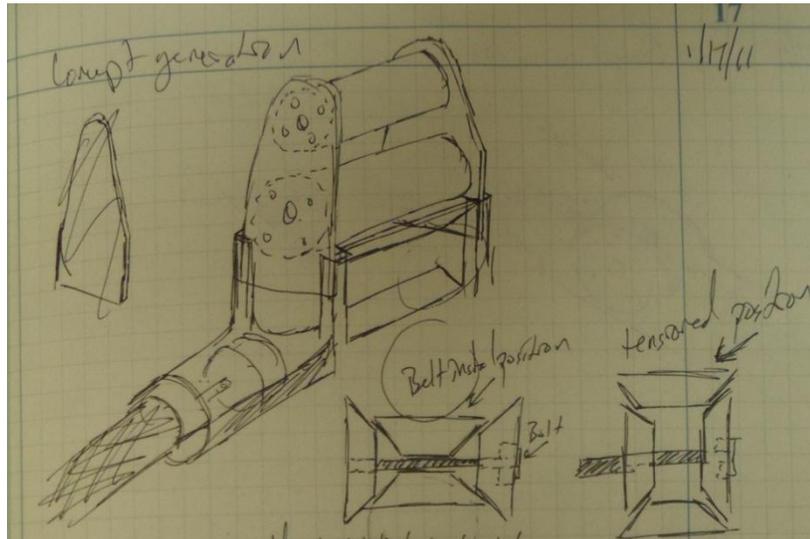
Initial sketch for the bank sucker concept. Note that the motors would mount on the upper assembly on both sides of the cylinder.
